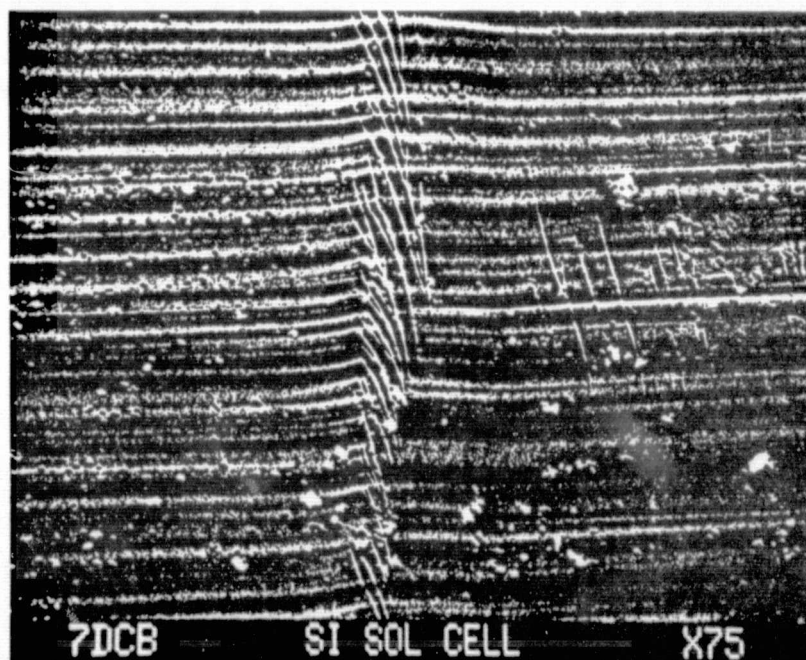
Silicon Fracture Surface, 75 X, Below Metal Trace
